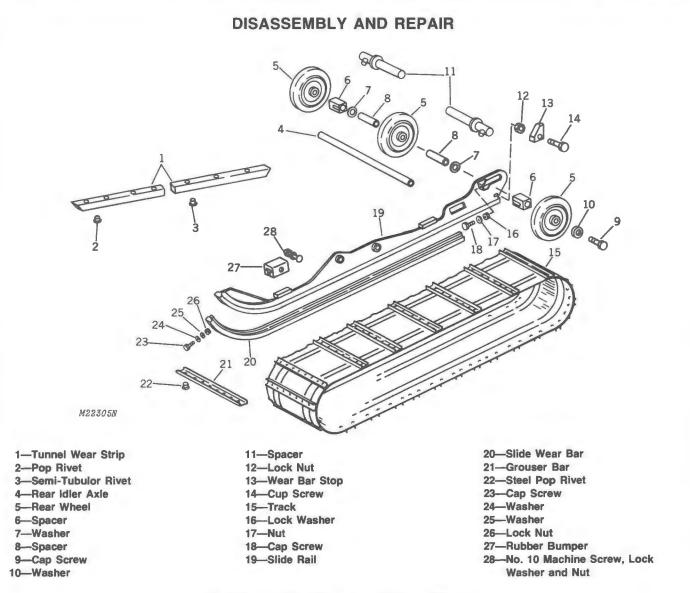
Exploded View of Rear Idler, Track and Slide Rails
